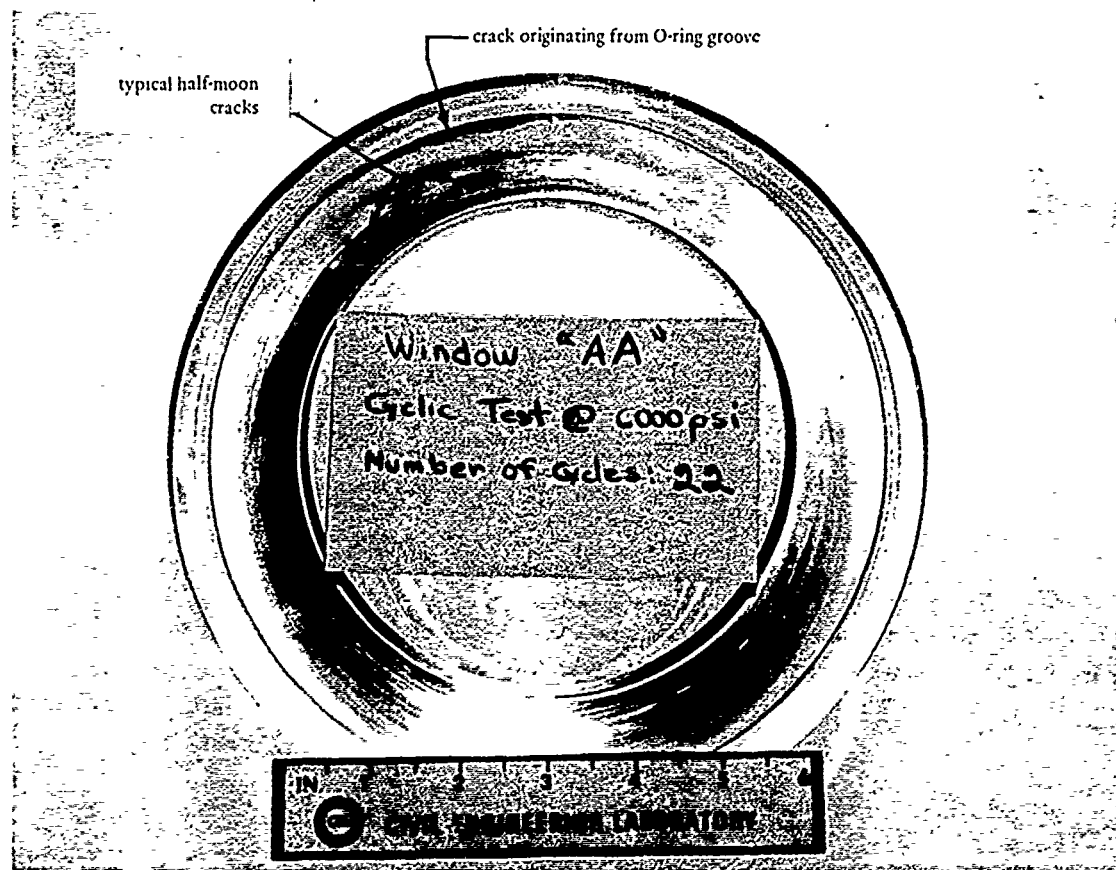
Typical cyclic fatigue cracks on the flange bearing surface; window AA, Type VI after 22 standard pressure cycles to 6,000 psi. Note that major crack originates at O-ring groove.
